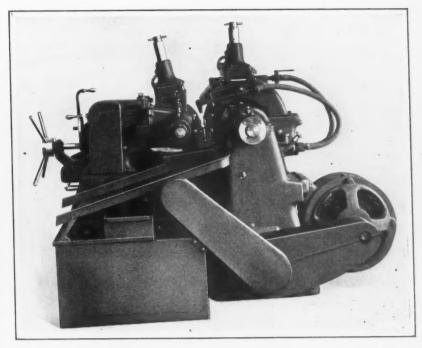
Rear View of the Cincinnati Centerless Grinder, showing the Motor Drive
